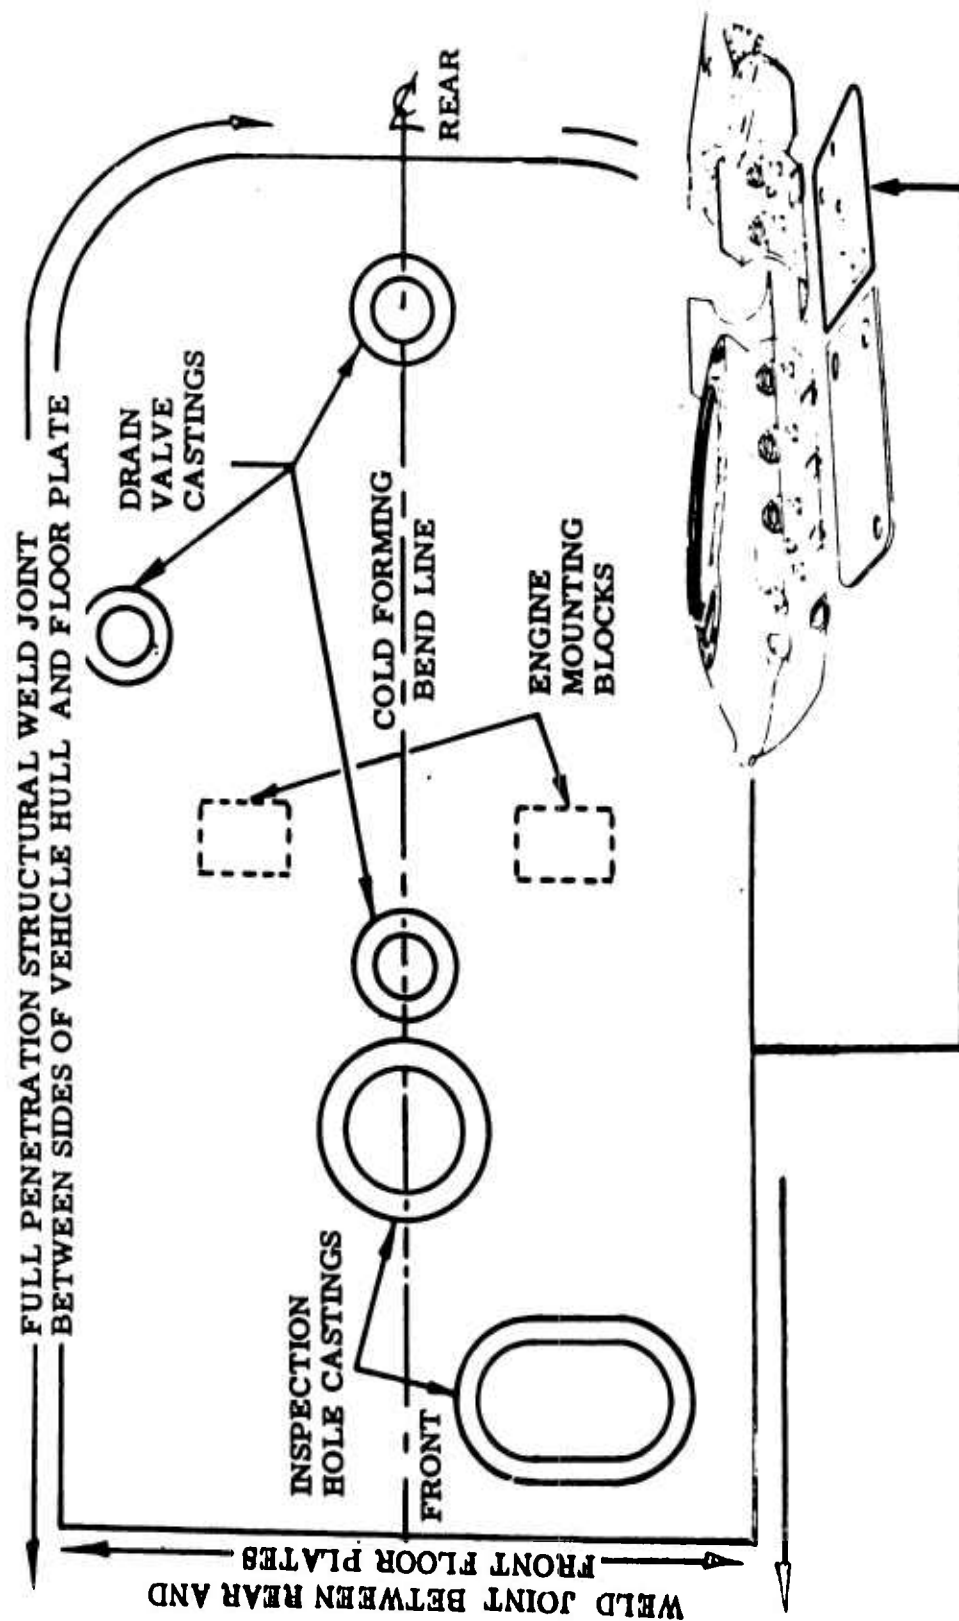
BOTTOM PLAN VIEW OF ENGINE COMPARTMENT FLOOR PLATE
